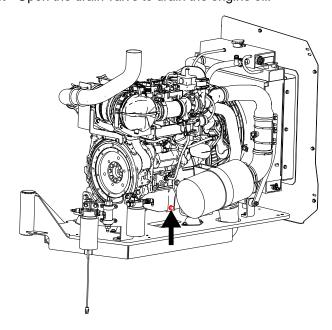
Deutz TD2.9 L4 engine oil drain valve
